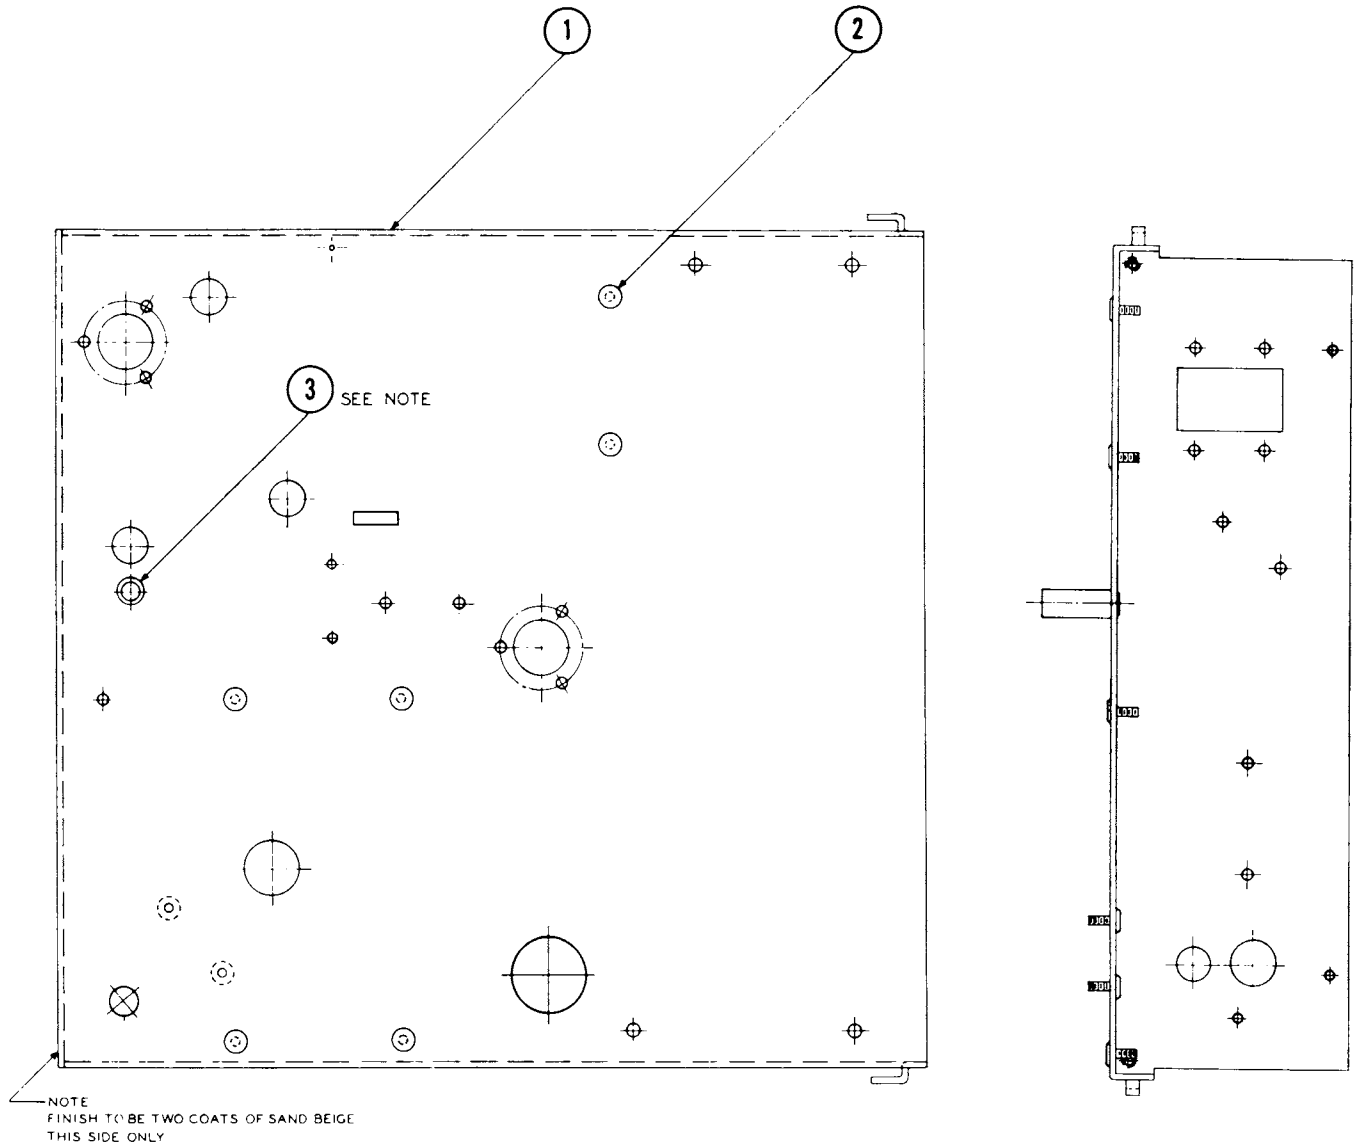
Assembly, Motorboard Weld, WW-5379-1D (Part of Assembly, Figure 5).
